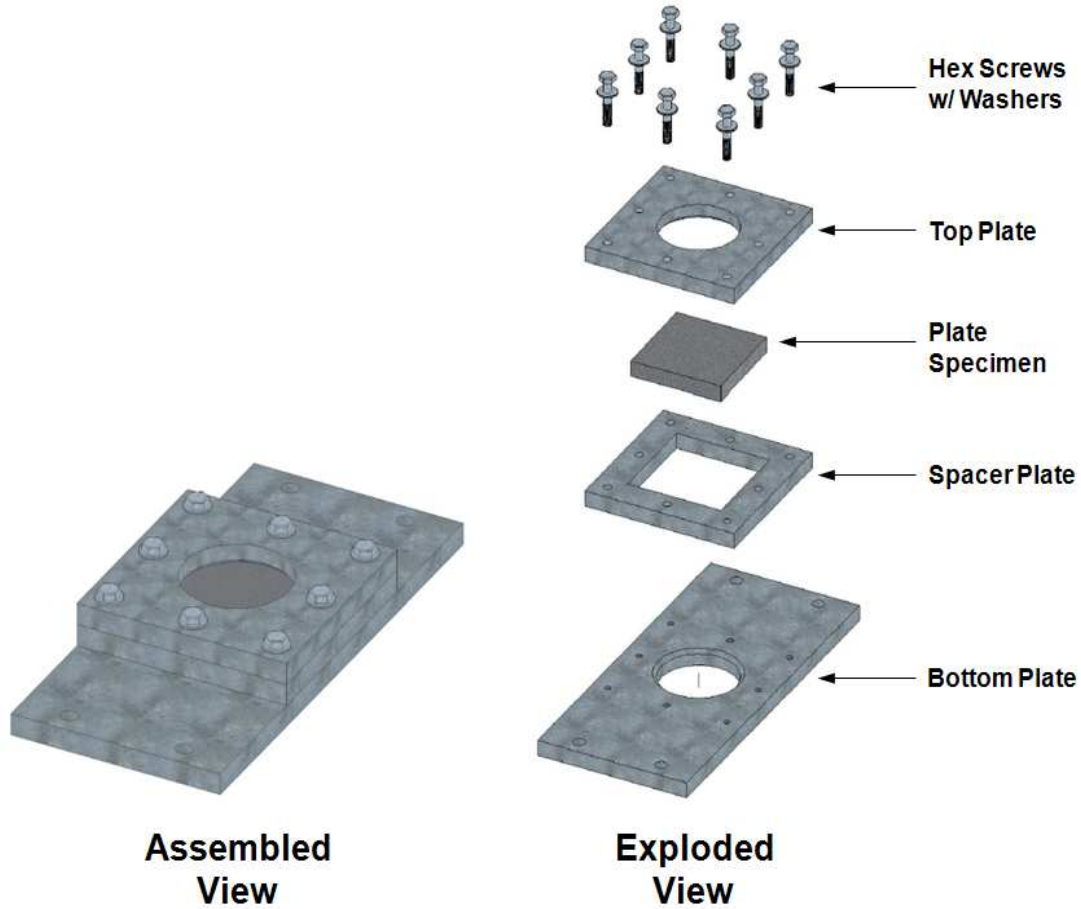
Assembled and exploded view of the plate specimen fixture used in the Dynatup apparatus.
